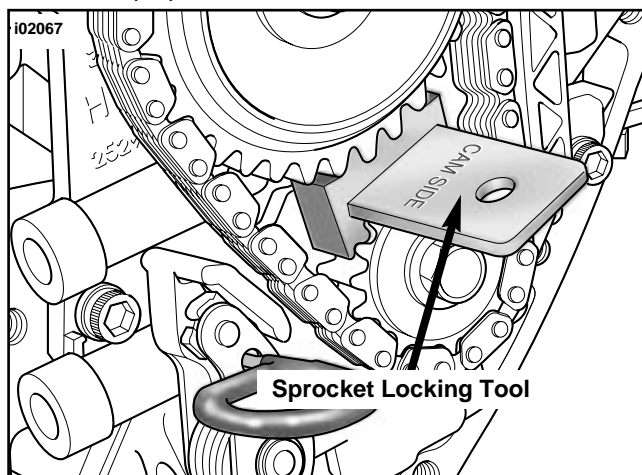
Crankshaft/Camshaft Sprocket Locking Tool (Part No. HD-42314)
